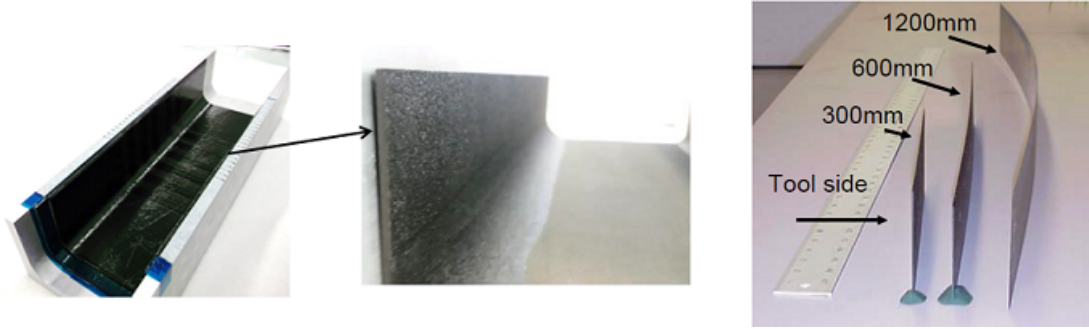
Spring-in of a composite spar section [17] and warpage of thin UD plates manufactured from an aluminium tool [18].
